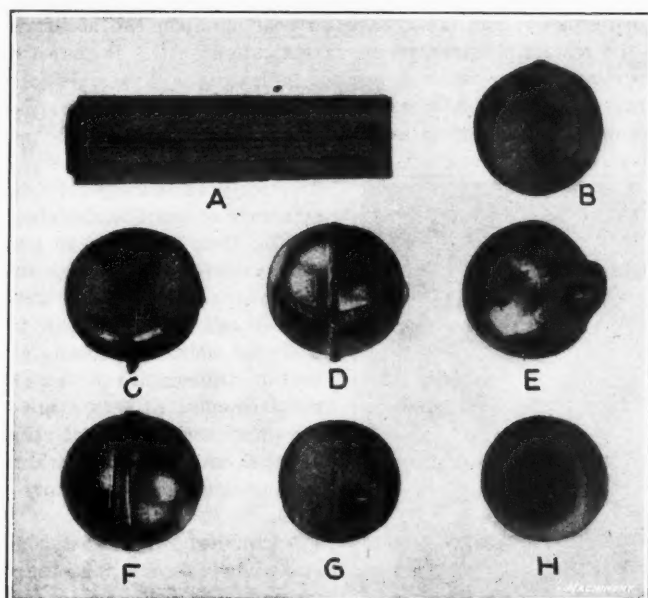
(A) Section of Steel Stock, showing Lamellar Structure; (B) Cross-section of Cold-header Ball Blank, showing Distortion of Steel Structure; (C) Cross-section of Header Cracked Ball Blank; (D) Ball Blank shown in Cross-section at (C); (E) Cold-header Ball Blank with Large Fin; (F) Perfect Cold-header Ball Blank; (G) Etched Ball, showing End Grain of Steel at Equator; (H) Etched Ball, showing End Grain of Steel at Pole
